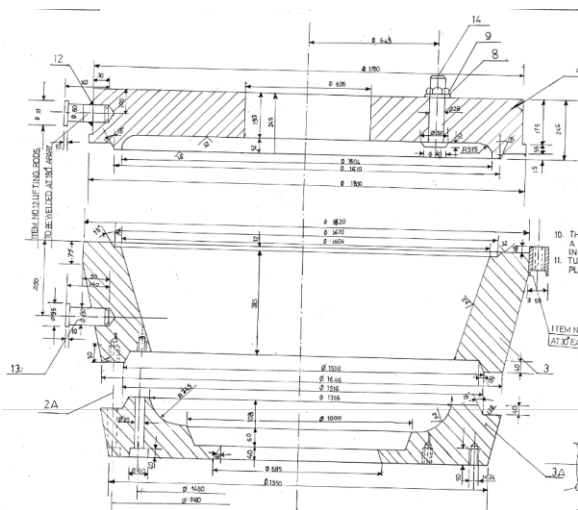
Centrifugal die dimensions used for making XRP1043 grinding roll
